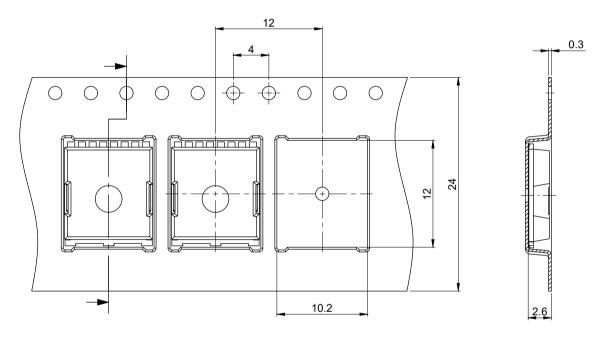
Packaging variant PG-HSOF-8, dimensions in mm
